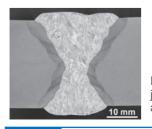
Macro section of butt joint shows consistent penetration and smooth fusion.
